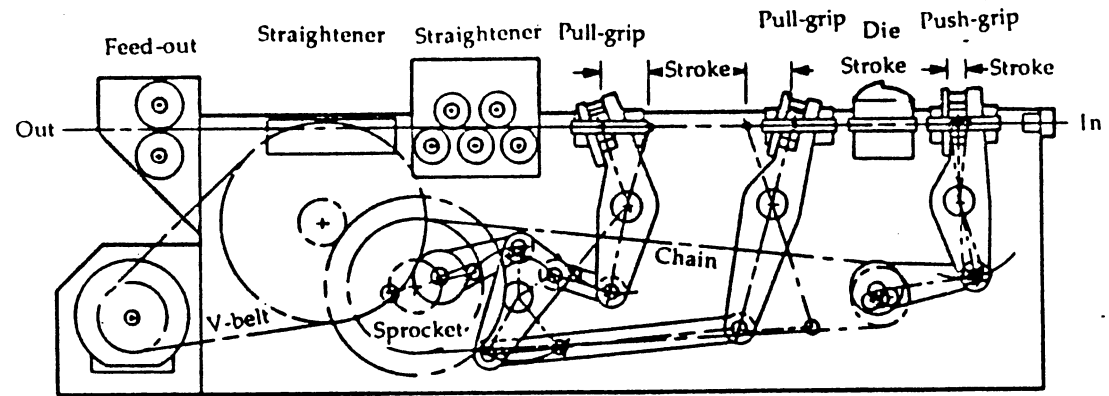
In-Line Drawing and Straightening Machine for Producing Cold-Drawn Bars from Hot-Rolled Steel Coils or Bars [Lange, 1985]
